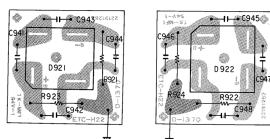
POWER SUPPLY P.C. BOARD (ETC-H22)
